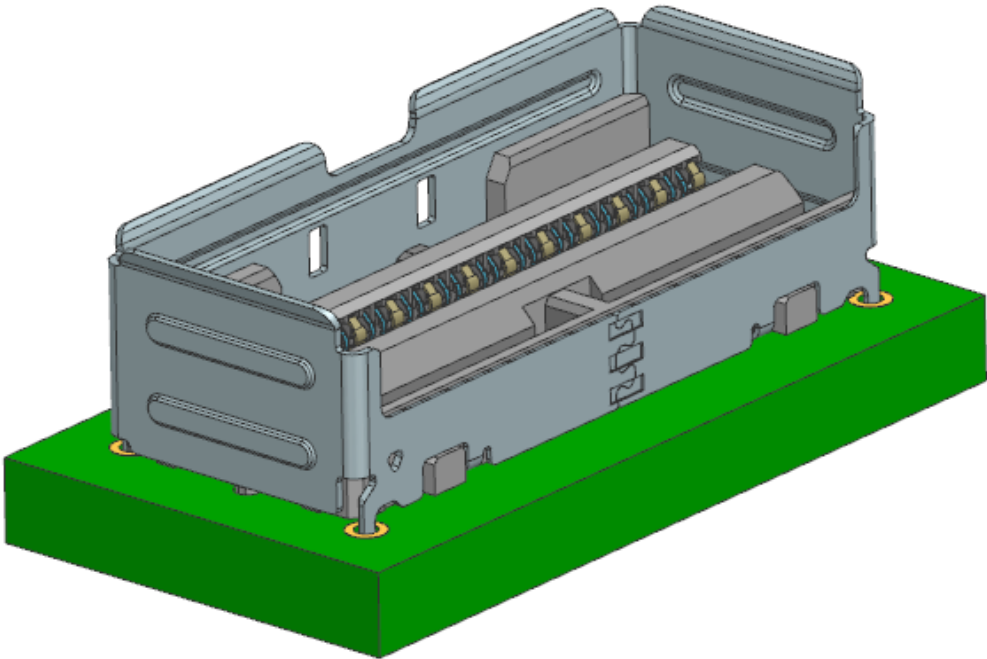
72-Pin Fixed-side Connector without Vacuum cap
